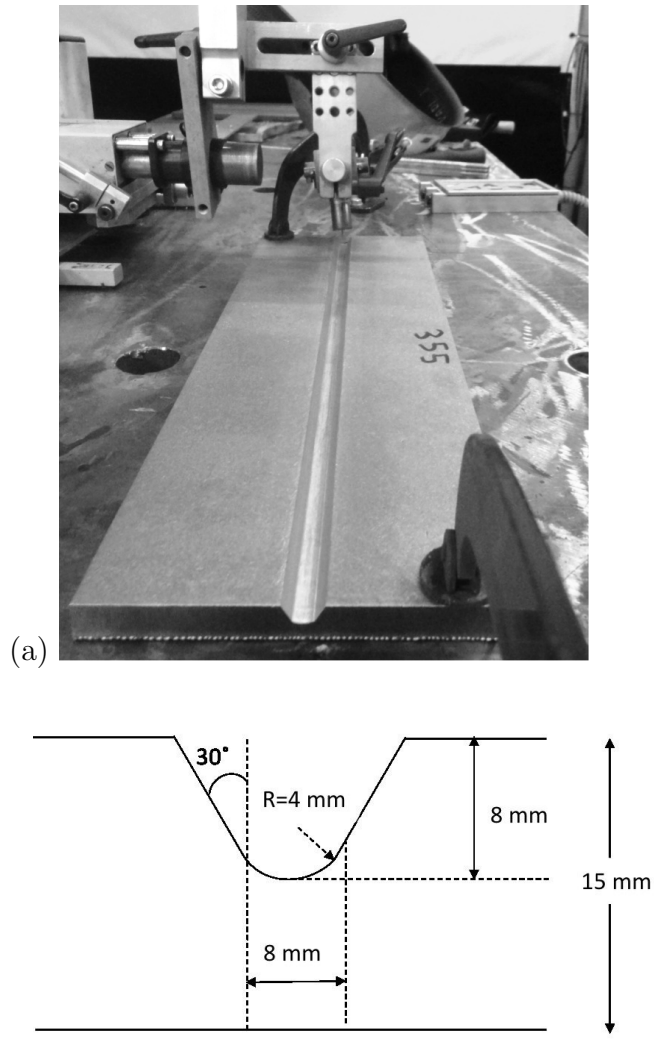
(a) Base material clamped in position and ready for automated welding
